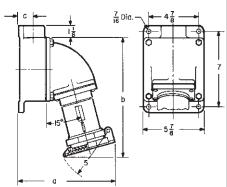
60 and 100 A Receptacle Assemblies
